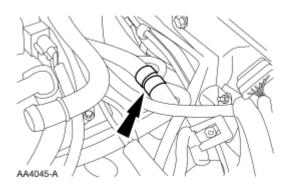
Fuel Charging Wiring In Crash Bracket Courtesy of FORD MOTOR CO.
